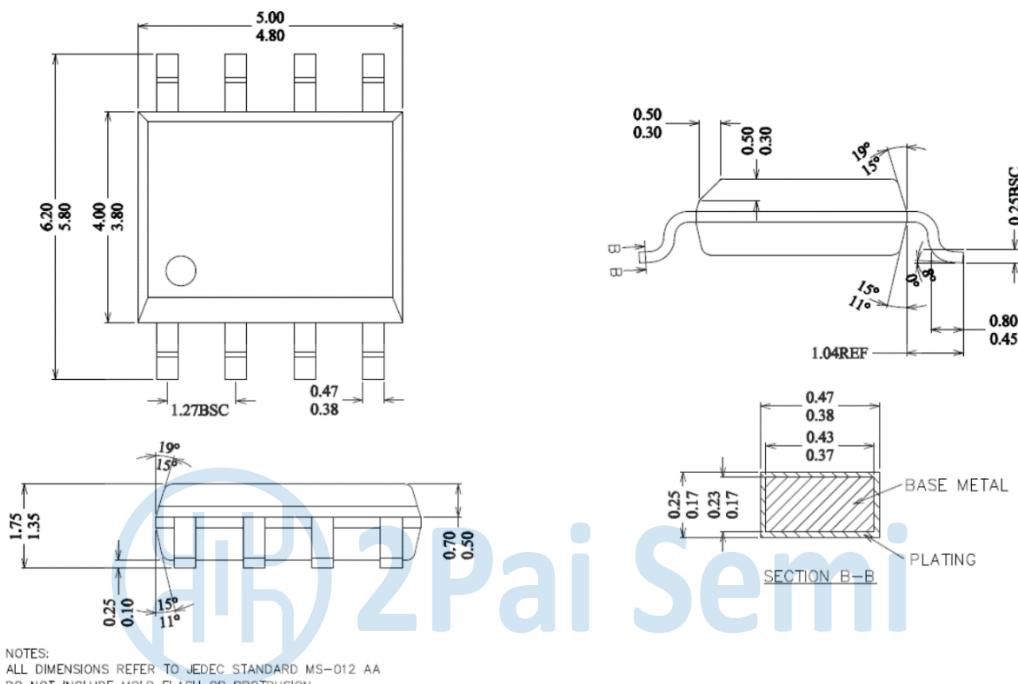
8-Lead Narrow Body SOIC [NB SOIC-8] Outline Package-dimension unit(mm)
